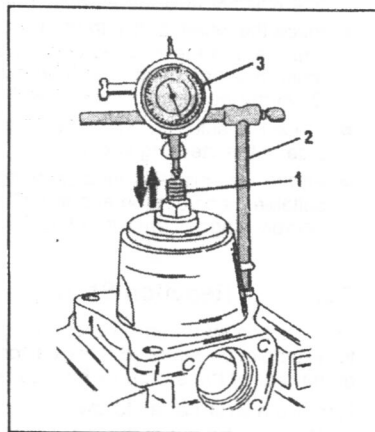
Checking the wheel bearing clearance. Place the stylus of the dial gauge (3) on the end of the bolt (1). Moving the bolt up and down will indicate the clearance of the dial gauge. The dial gauge holder (2) is attached to the steering knuckle.
